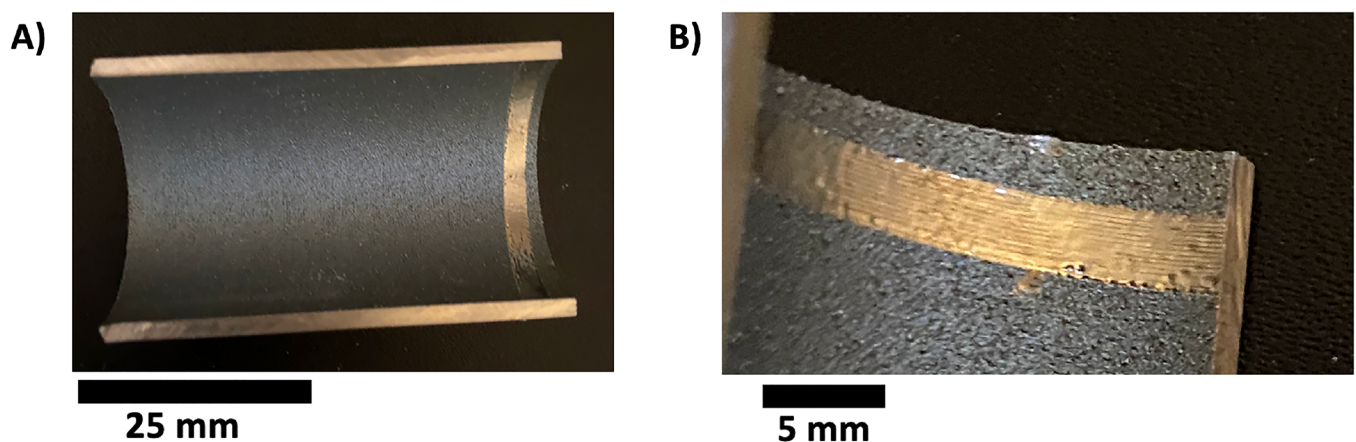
Photographs of the internal surface of a hollow cylinder, which has been sectioned after polishing to view the polished area. (a) shows the full length of the cylinder and (b) shows closer to the surface.
